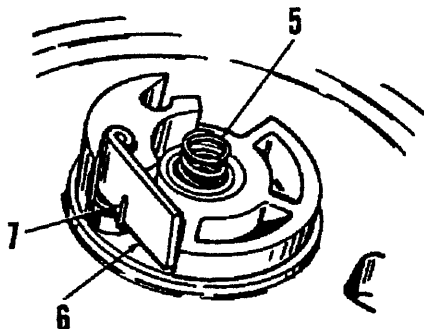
When assembling, make certain that parts (5, 6 & 7) are assembled as shown. End of dog return spring (7) should pull dog in.
